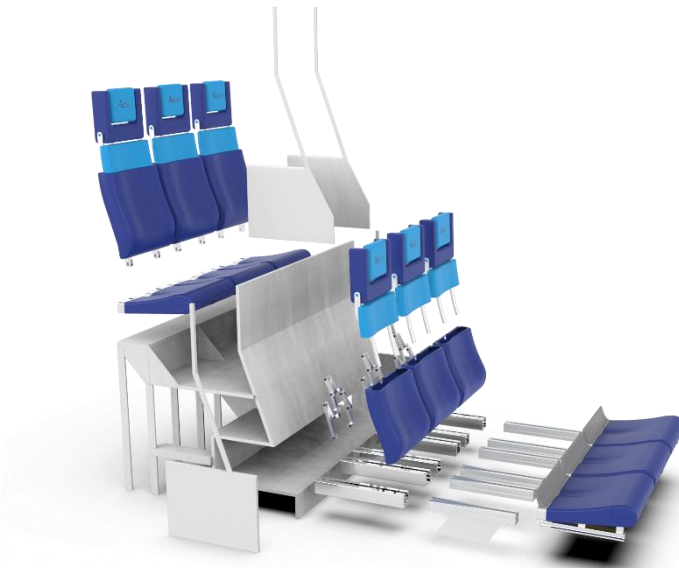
Exploded view of 6 seats indicating its modularity. The seat pan of the lower row can disappear under the back rest enabling in- and egress.
